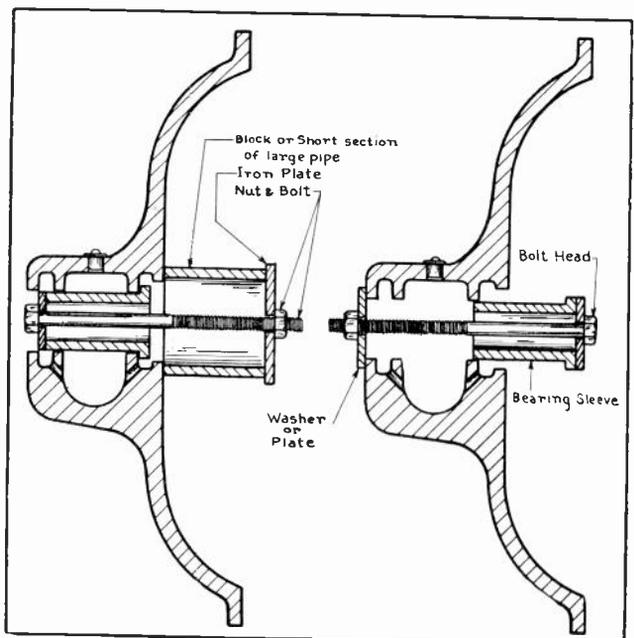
The sketch on the left illustrates a convenient method of removing a sleeve bearing; and on the right is shown the method of replacing the bearing.
